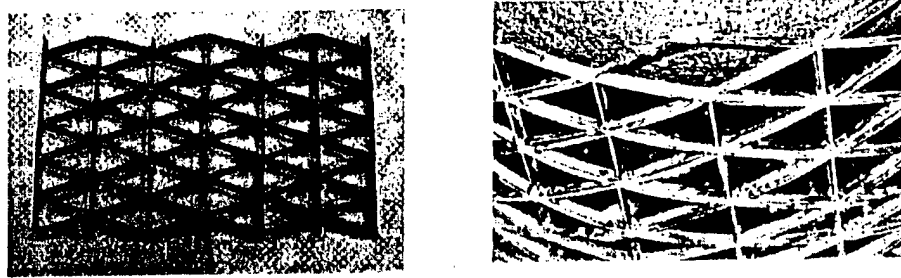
Trigrids with one discontinuous rib in flat plane and cylindrical shell.
